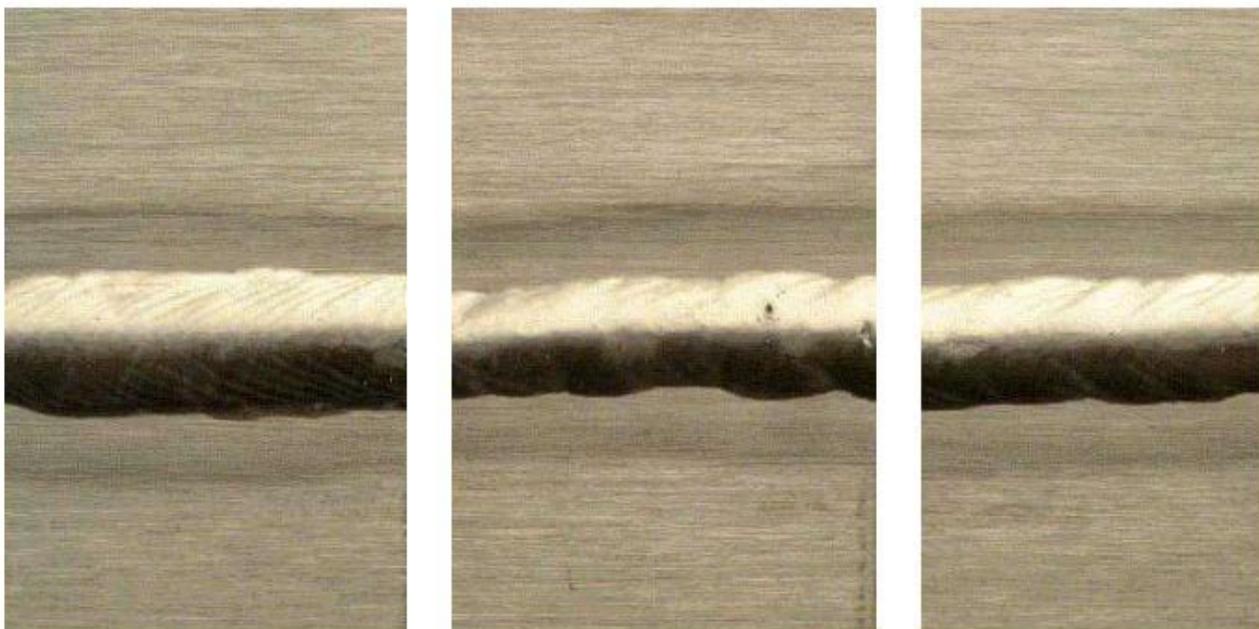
INCONEL 622 welded with INCO-WELD 686CPT filler metal (pitting resistance of various base metal and weld metal combinations).
